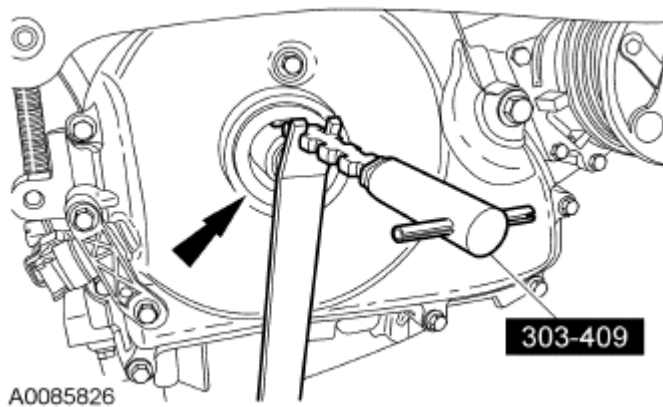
Removing Crankshaft Front Oil Seal Using Oil Seal Remover
